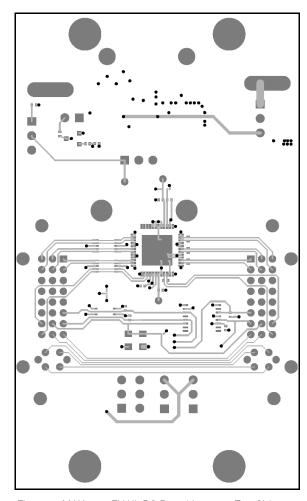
MAX3815 EV Kit PC Board Layout—Top Side
